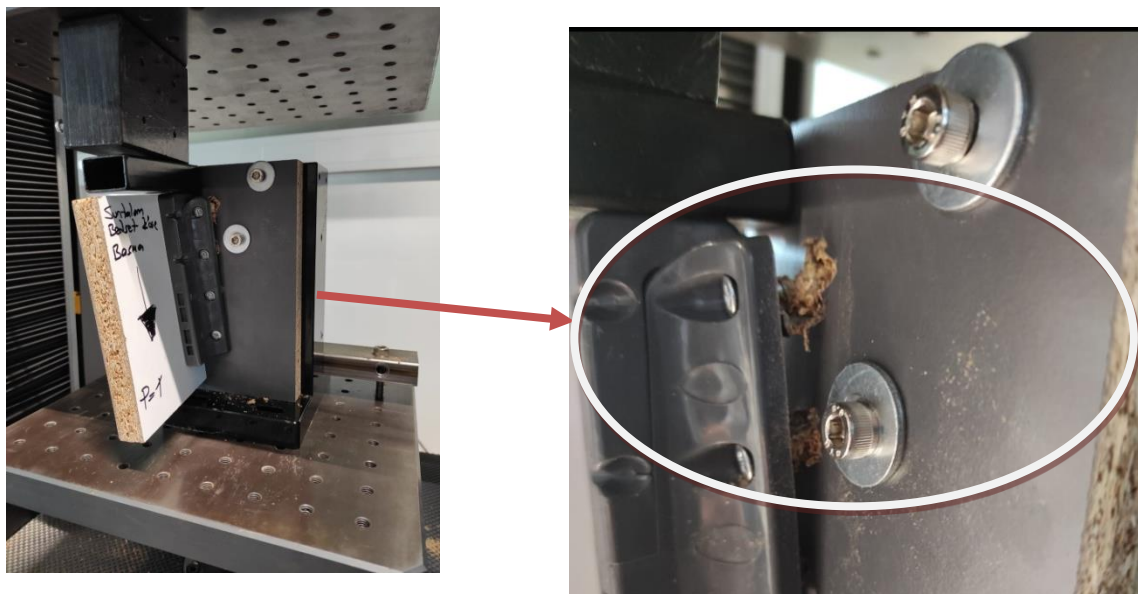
Separation surface of the result of the chipboard module combined with the BEDSET slide fixing apparatus.
